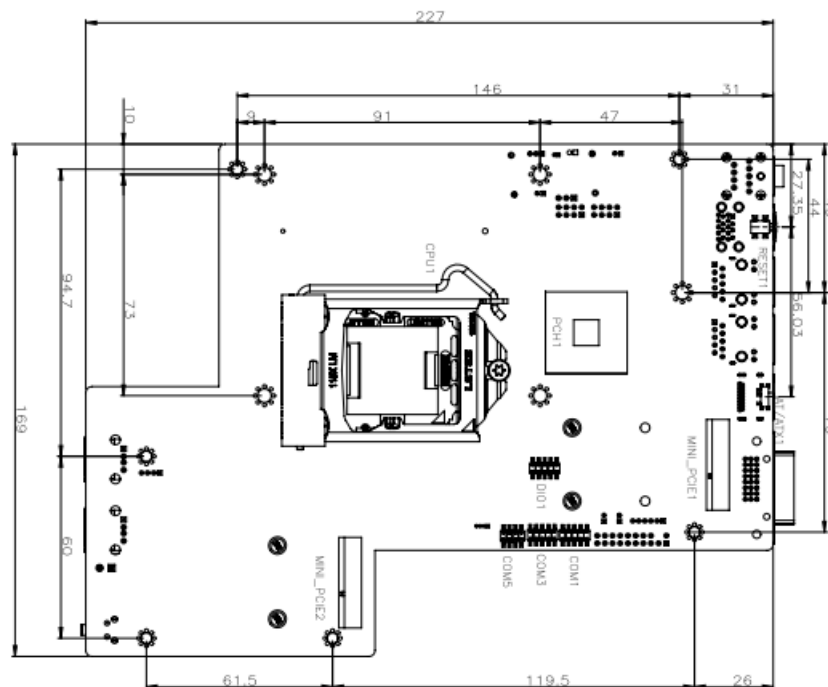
Motherboard Dimensions (Rear Side) (mm)
